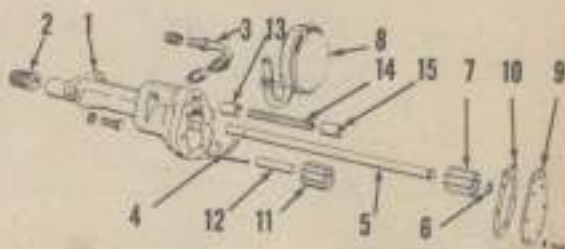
Exploded view of D-17 non-diesel engine oil pump used after engine serial No. D17-19978 with full flow oil filtering system.
